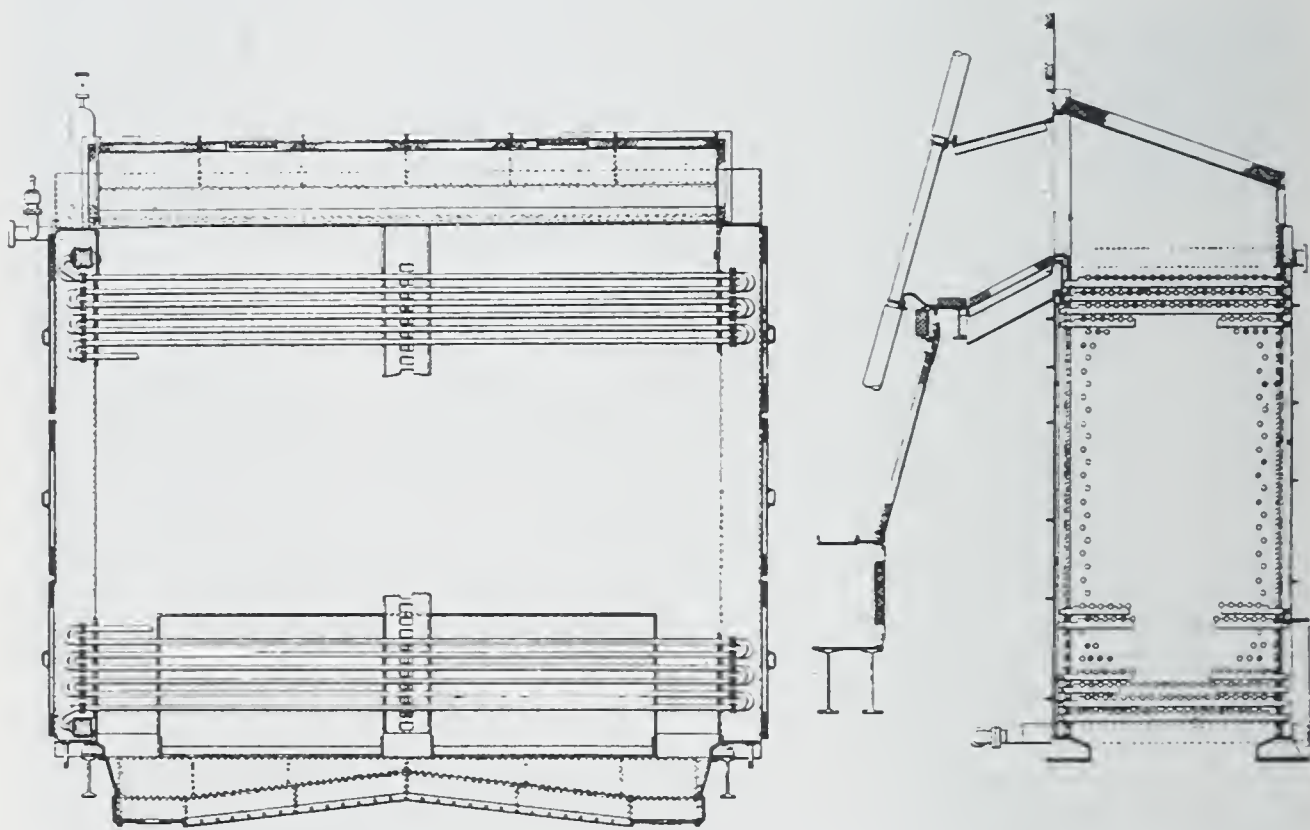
Side and End View of Return-Bend Wrought-Steel Economizer.
